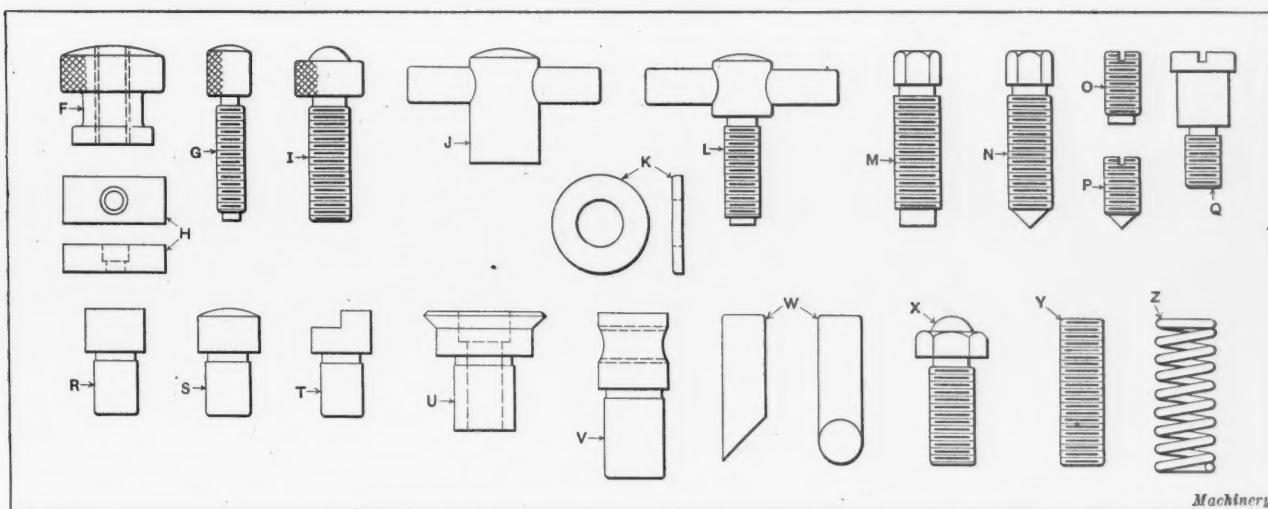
Standardized Details made on a Manufacturing Basis for Use on Jigs and Fixtures
